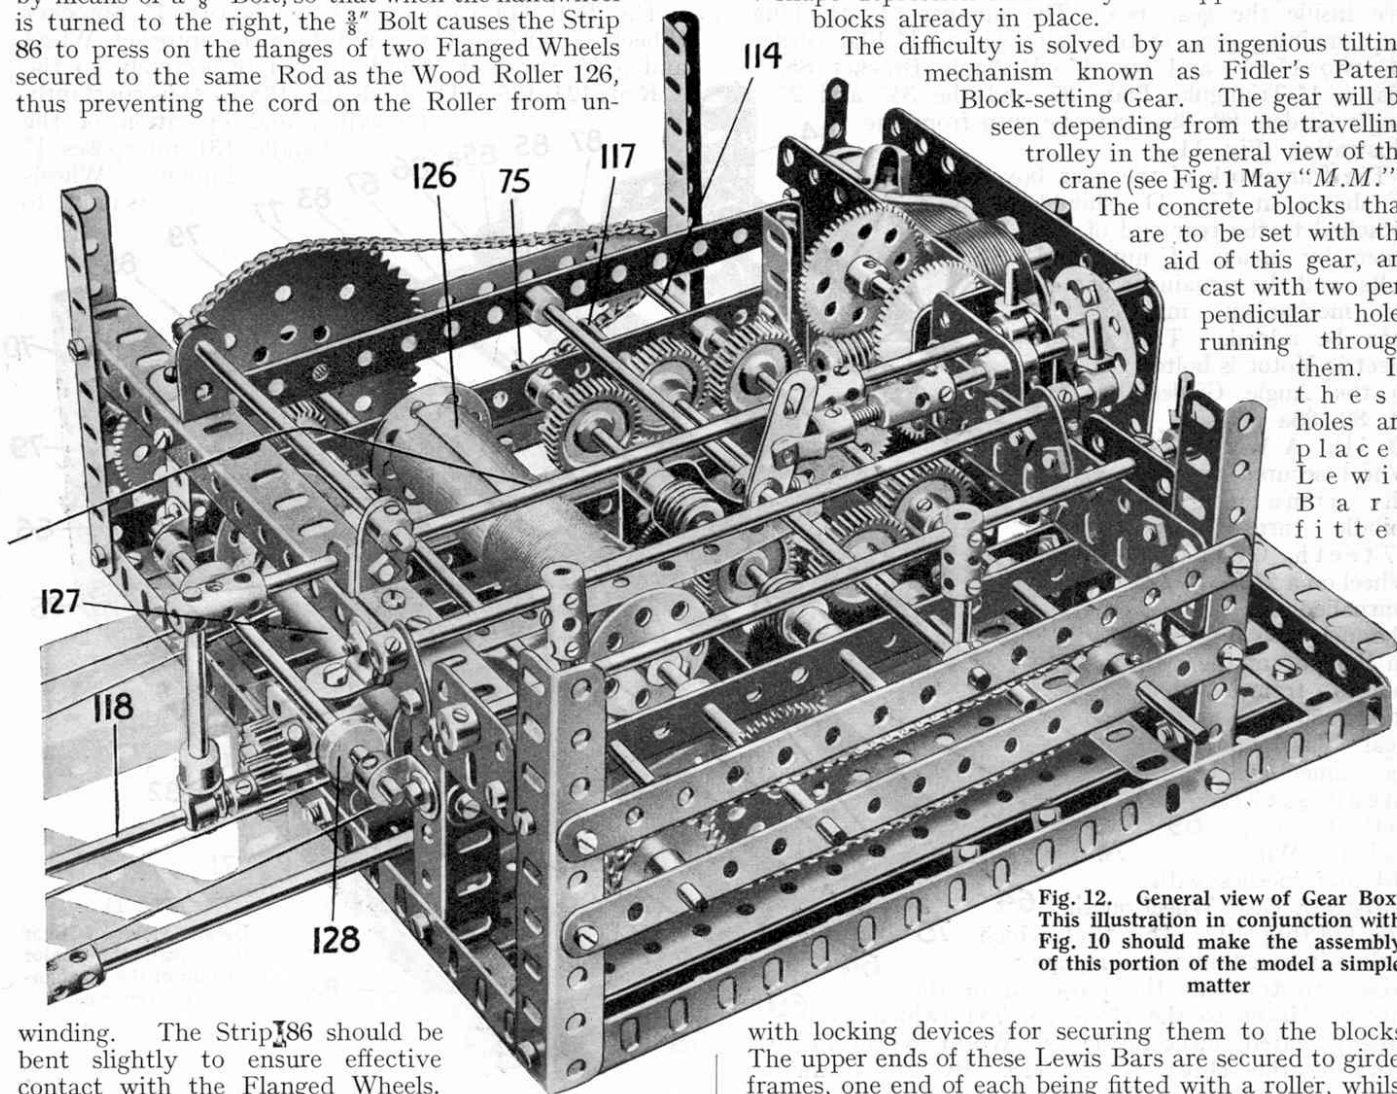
General view of Gear Box. This illustration in conjunction with Fig. 10 should make the assembly of this portion of the model a simple matter
